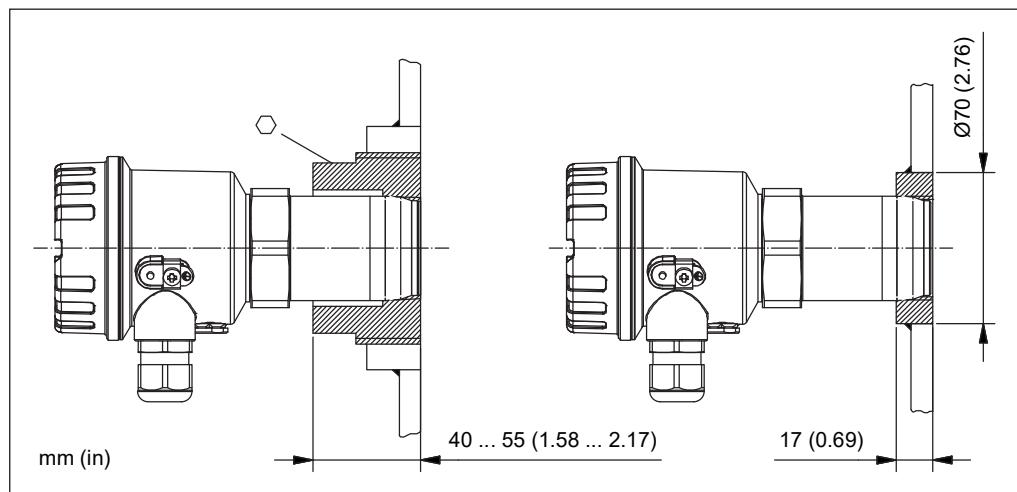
Dimensions of weld-in or screw-in adapter FAR52
